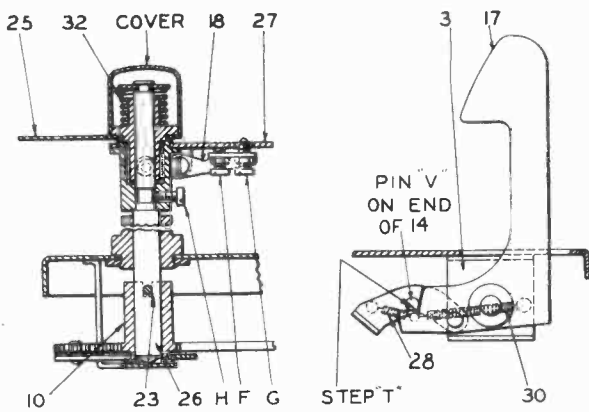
Details of Record Shelf Posts, and Locating Lever Assemblies
